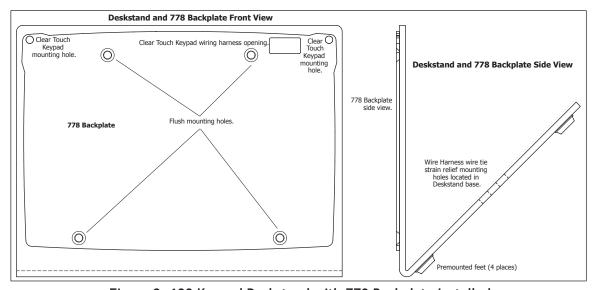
699 Keypad Deskstand with 778 Backplate Installed
